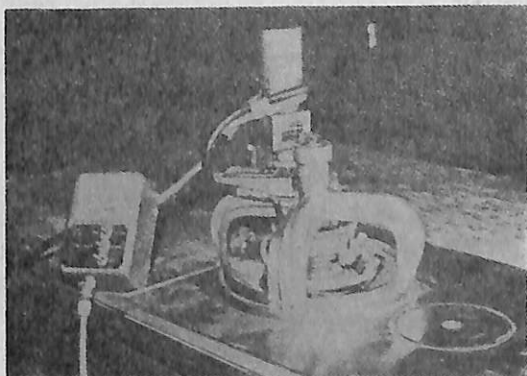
Mechanized welding of reinforcement pads on Invar strakes. (文献 iii)
